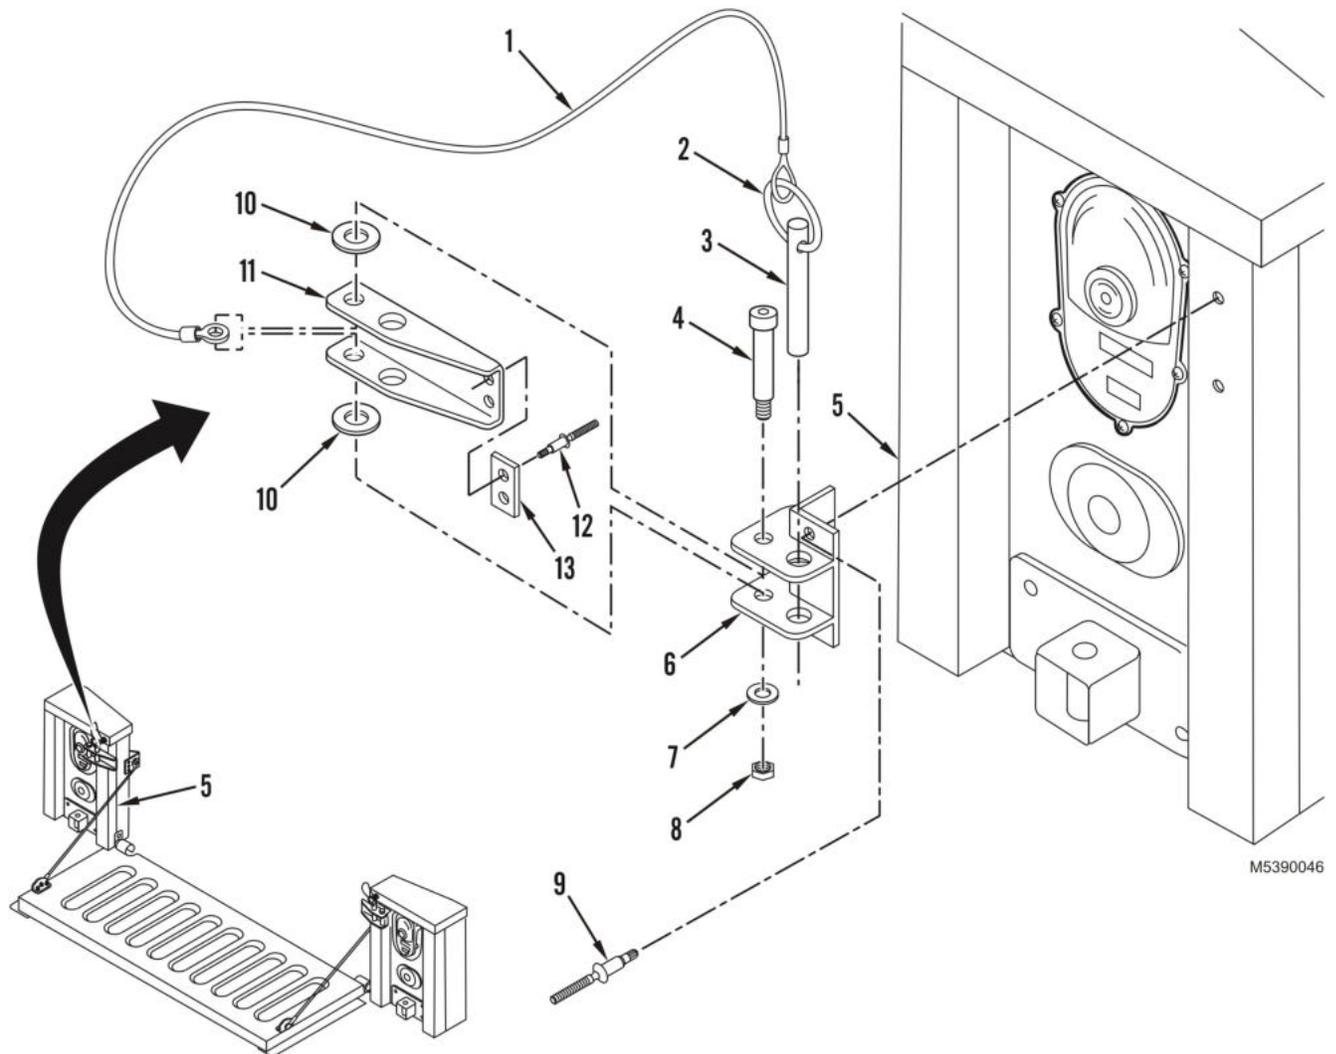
Tailgate Latch Assembly and Latch Assembly Pin Removal and Installation.
